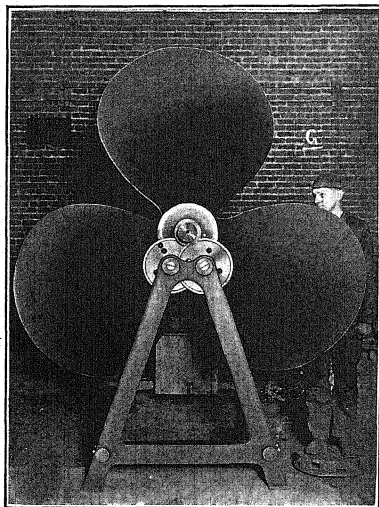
WHEEL MOUNTED ON BALANCING STAND.
